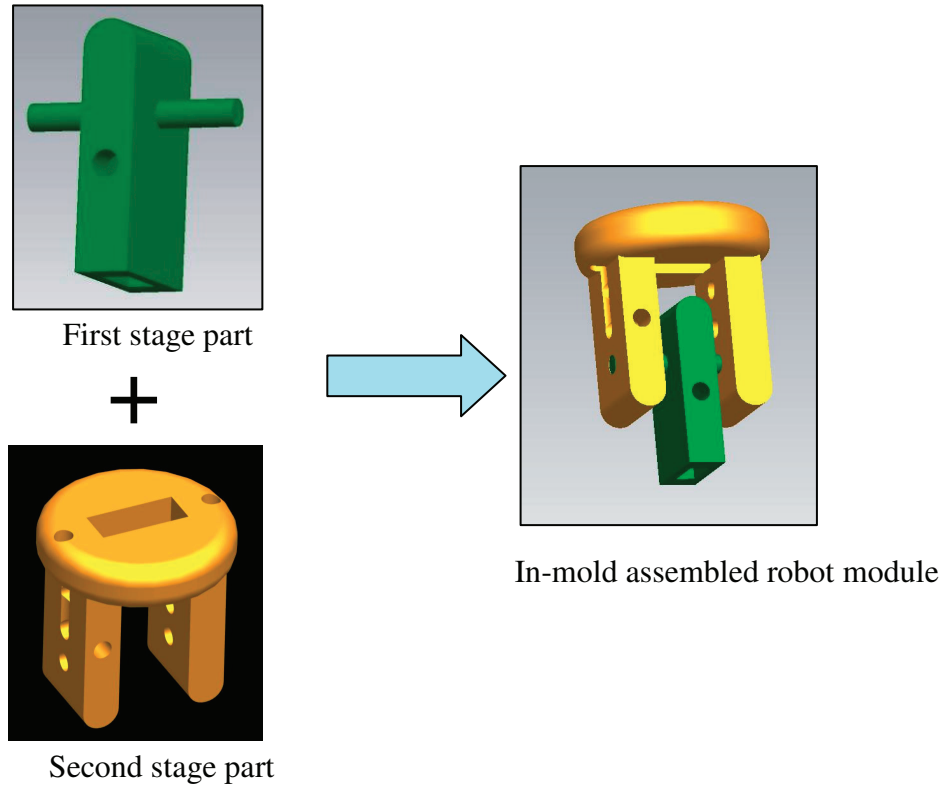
Molding sequence for in-mold assembly of 6 DOF robot
